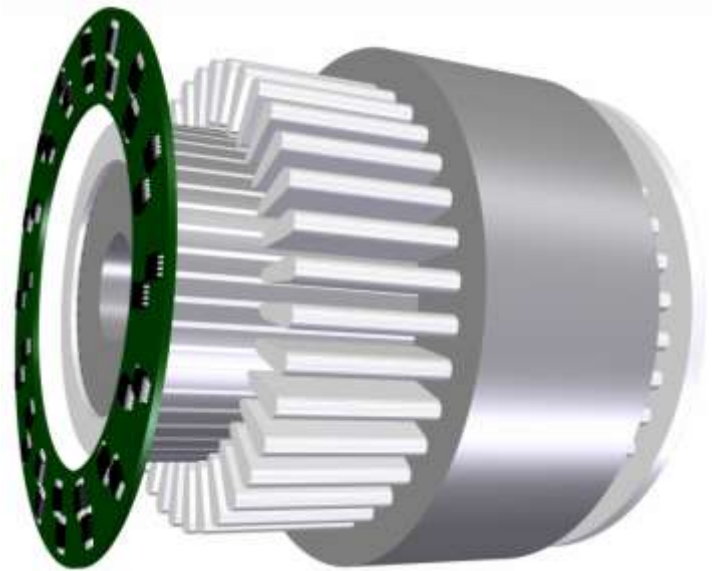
Sketch of a highly integrated ISCAD drivetrain
